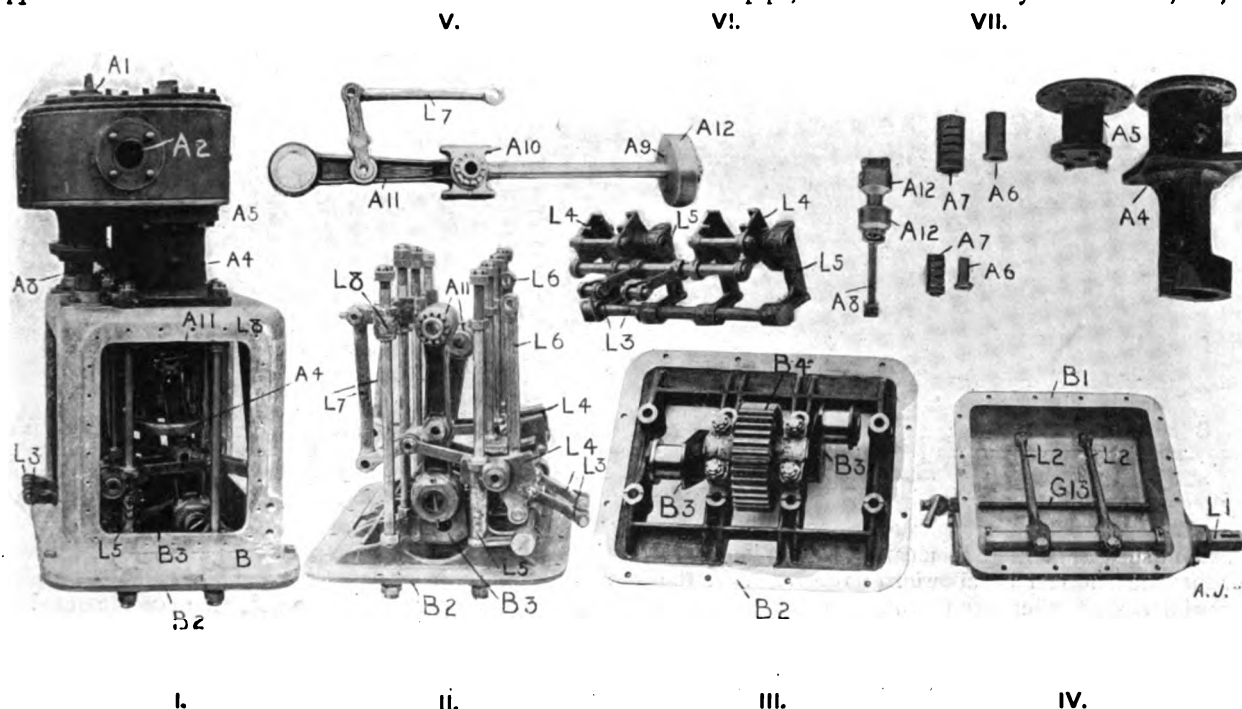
The Clarkson Steam Engine and some of its more important parts. (I) The complete engine, from the right side (shown vertically). (II) The bed-plate, B², with its steel pillars, crank-shaft, B³, connecting-rods, A¹¹, and valve-gear. (III) The bed-plate, B², with crank-shaft, B³, and spur-wheel, B⁴. (IV) The base casting, B¹, with oil valve-gear, G¹³, and reversing shaft, L¹. (V) One of the pistons, A³, with its cross-head, A¹⁰, connecting-rod, A¹¹, and a portion of the reversing-gear. (VI) One of the chief portions of the "Joy" valve-gear. (VII) A piston-valve, A³, an inner cylinder-cover, A⁵, and a crosshead-guide casting, A⁴, together with packing sleeves, A⁶, and springs, A⁷, for the piston- and piston-valve rods.
